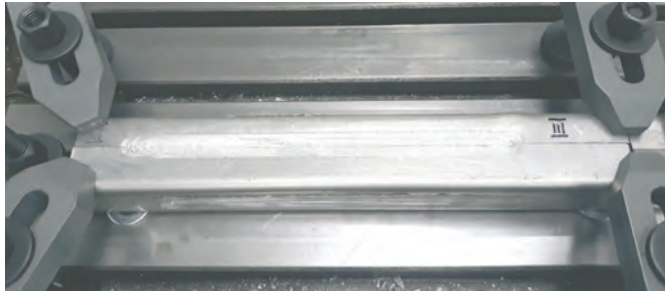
Appearance of FSW welding with mark III, initially executed.
